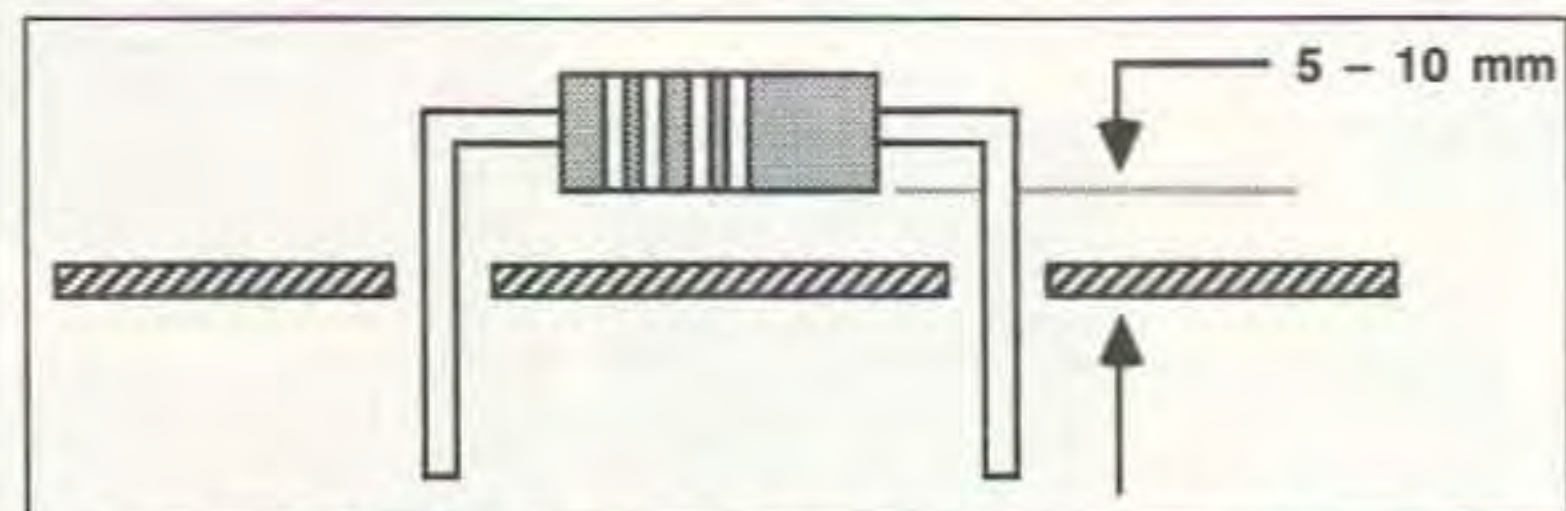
Power resistors (1 watt and up) should be mounted off the board surface.
